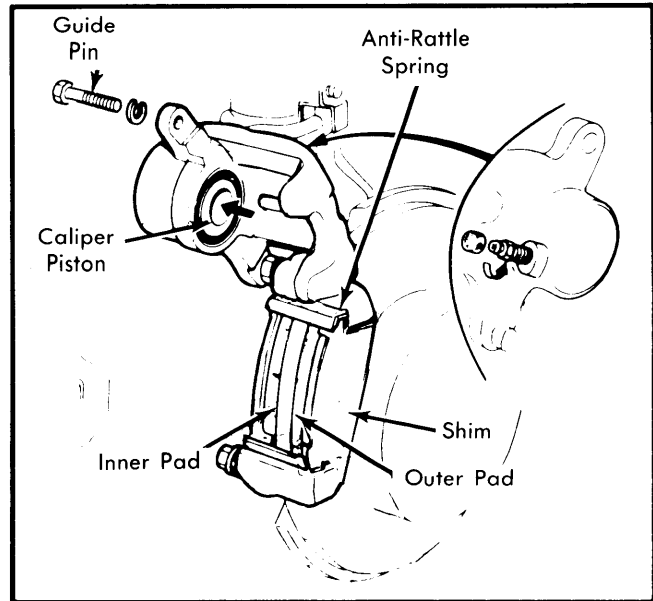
Replacing Front Disc Brake Pads (Civic Hatchback and Prelude)
